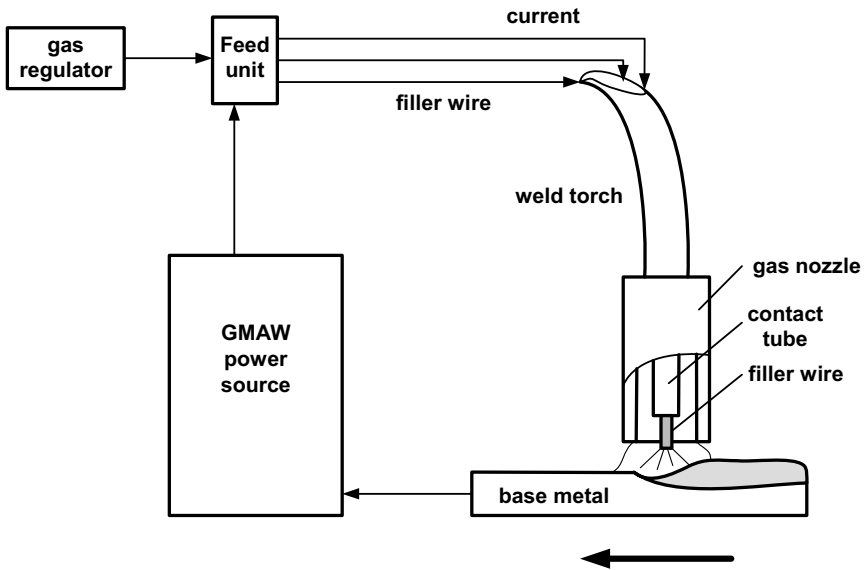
Schematic representation of gas metal arc welding process (GMAW)
